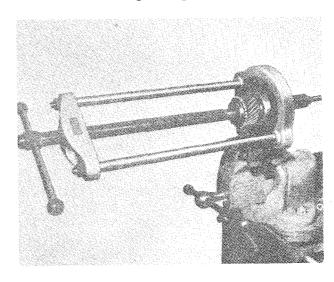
Fitting Bearing on to Constant Pinion Shaft with Churchill Press No. S4221 and Adapter from Set No. S4615.
